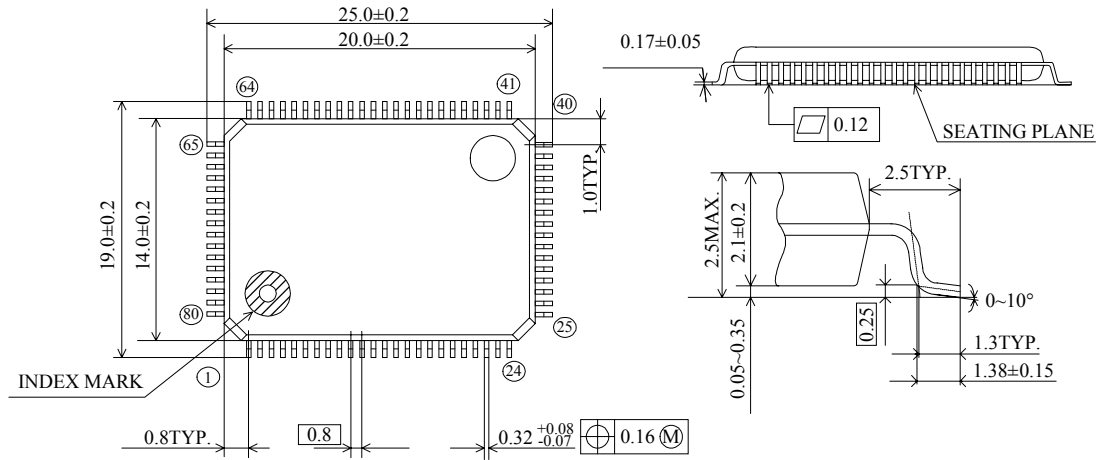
80-Pin QFP:GP Package Dimension Diagram
